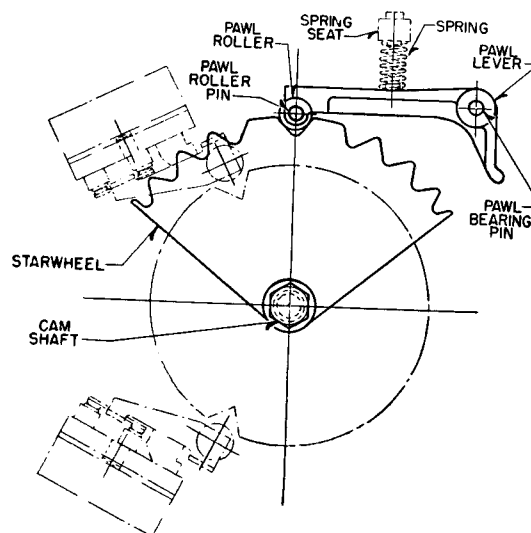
Starwheel, Pawl and Roller Assembly (Dwg. 5-C-4930)
